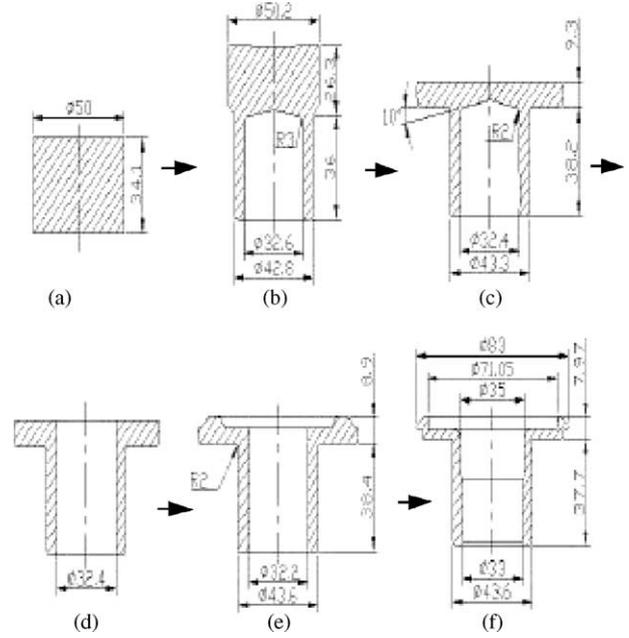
Schematic description for the sequential forming processes of the impeller hub (conventional): (a) bar cutting; (b) forward extrusion; (c) upsetting; (d) piercing; (e) finishing; (f) machining.
